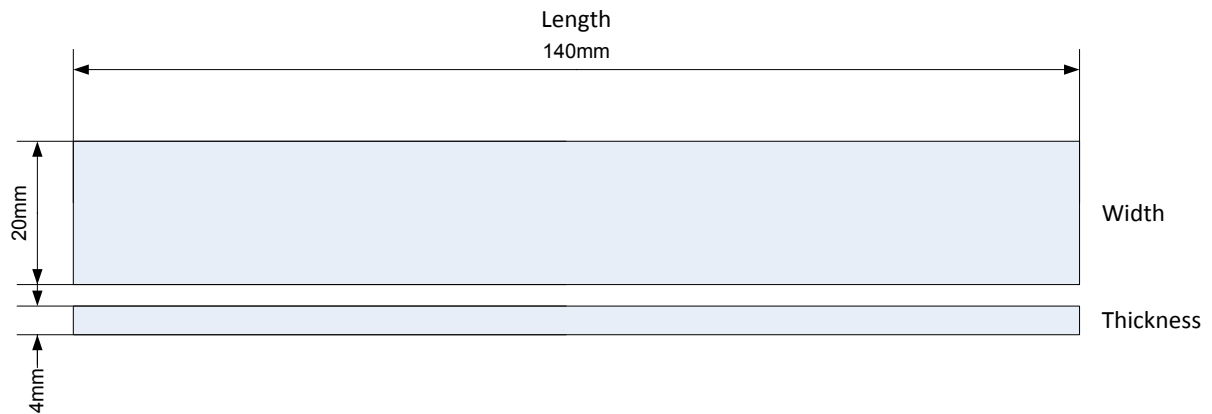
GFRP specimen dimensions for Three Point Bend testing
